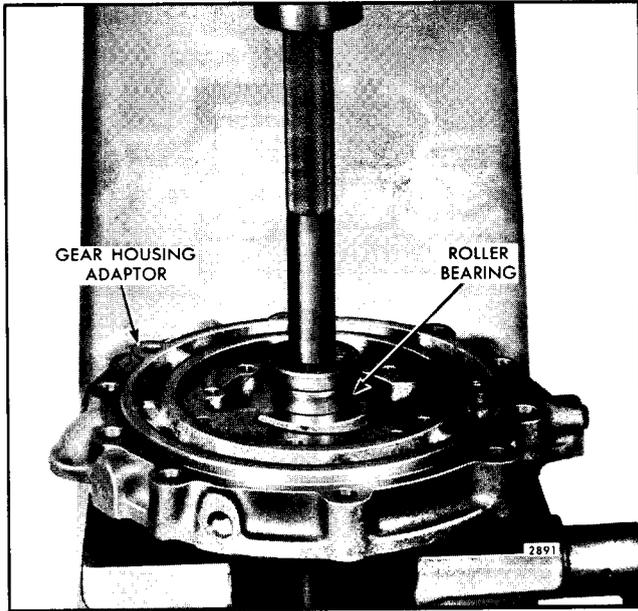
Installing Roller (Needle) Bearing in Gear Housing Adaptor
